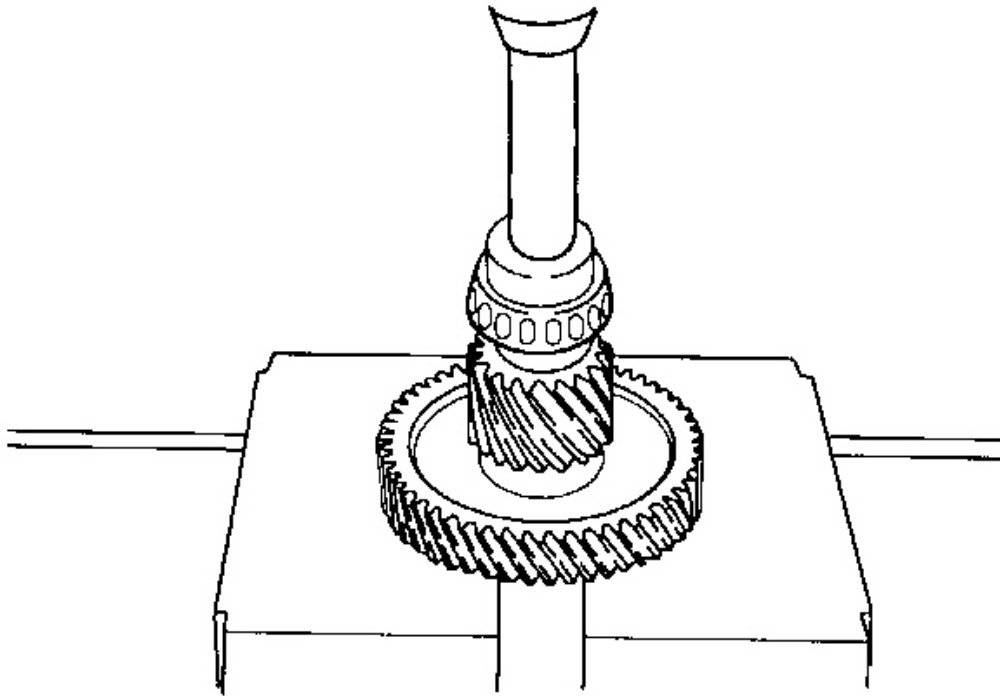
Tapered Roller Bearing & Transaxle Housing Side
